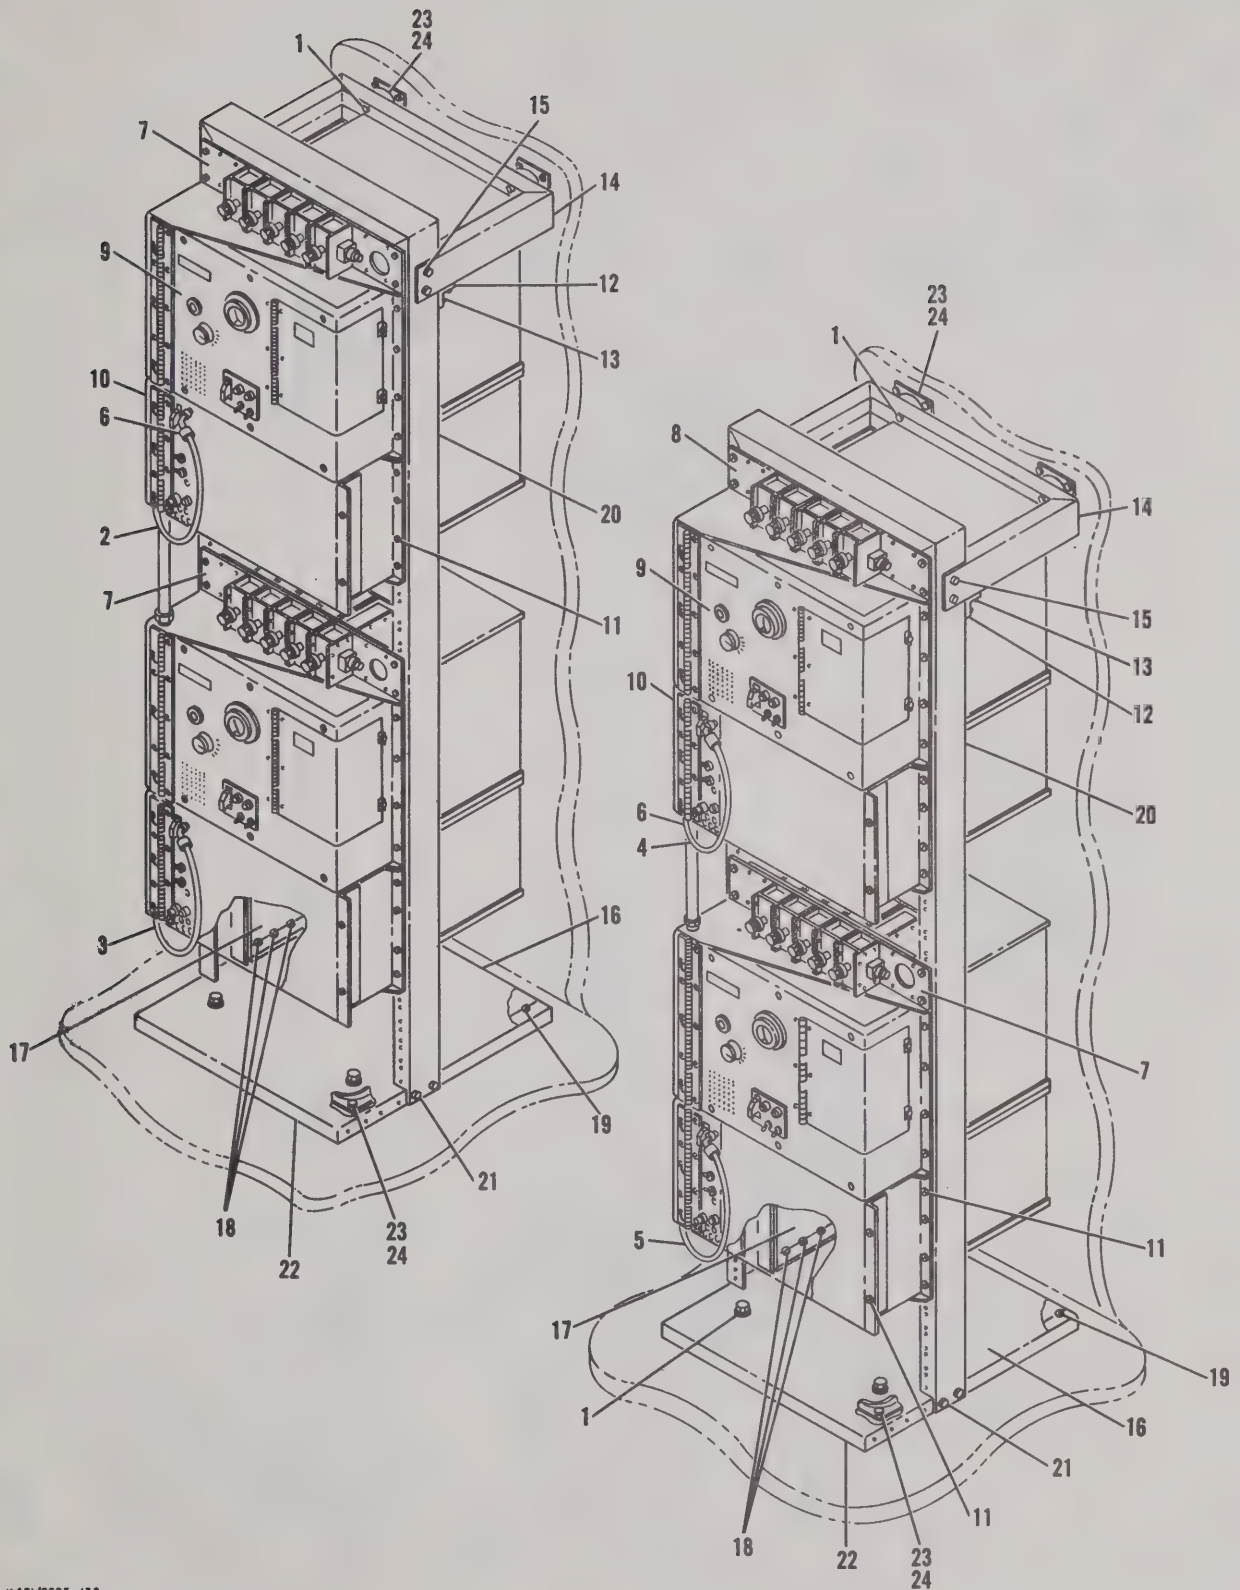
Assembly of Electron Tube Liquid Cooler
